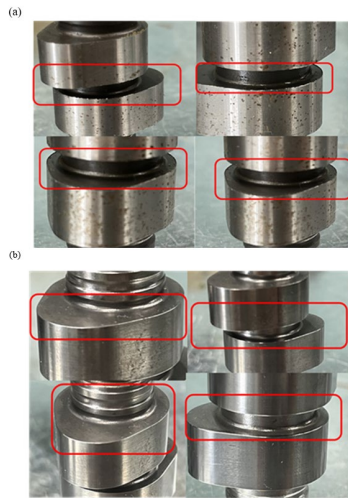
(a) Camshaft surface before machining (b) Camshaft surface after machining.
